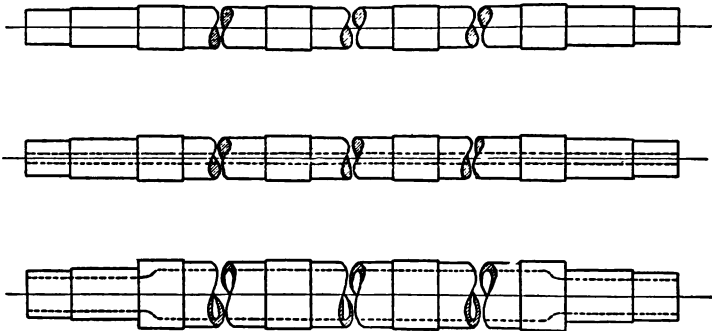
THREE TYPES OF STERN-WHEEL SHAFT: ONE SOLID; ONE WITH A HOLE BORED THROUGH IT; AND ONE HOLLOW FORGED.
